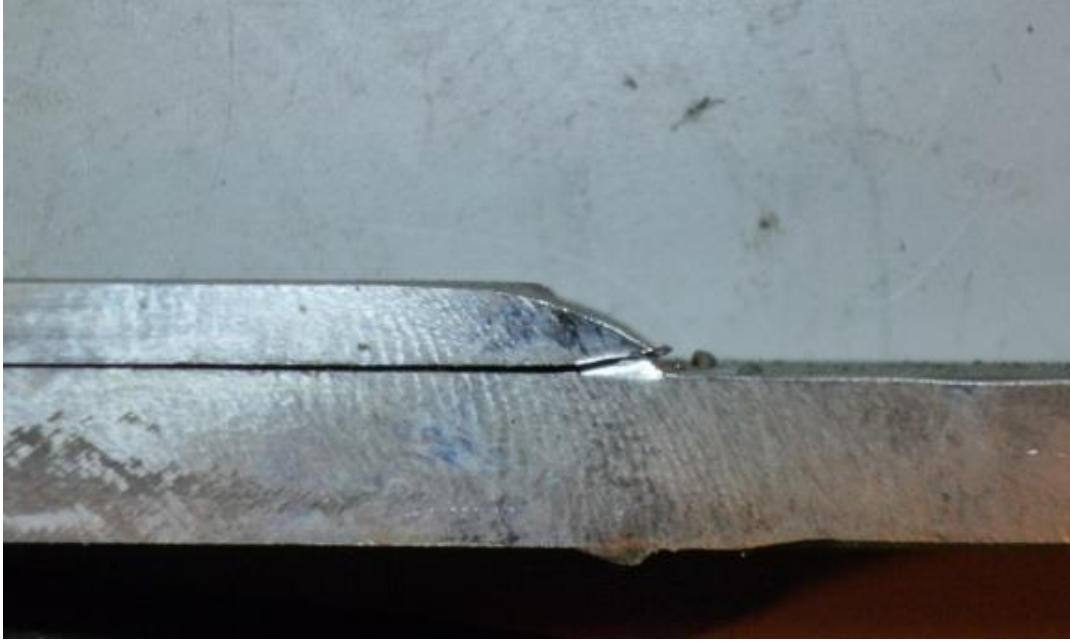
Fillet-welded specimen under transverse shear loading condition
